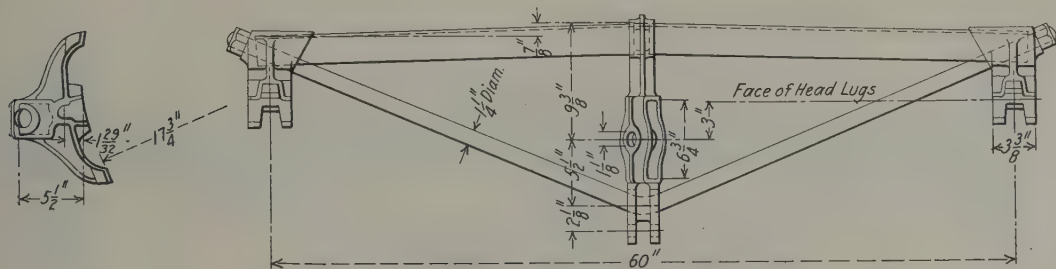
No. 2, 15,000 lb. Capacity Buffalo Truss Brake Beam. Buffalo Brake Beam Company.
